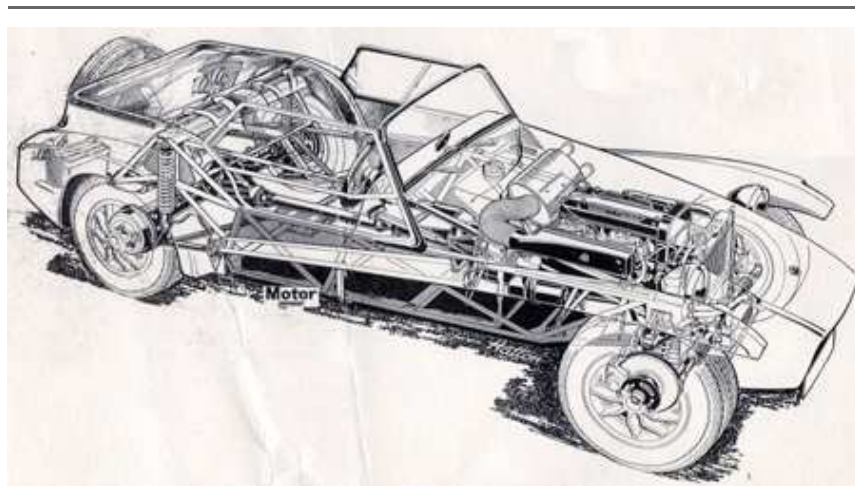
A cut-away drawing of the Twin Cam version of the Seven S4 showing the chassis and body components (Motor magazine).
